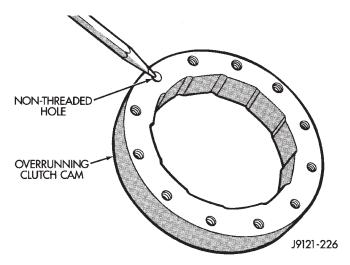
Location Of Non-Threaded Hole In Clutch Cam
